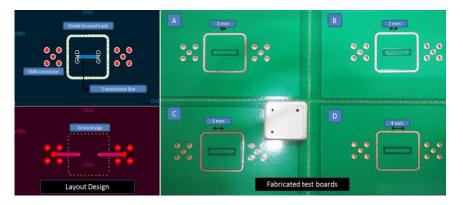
Layout design and fabrication of test boards with various grounds via spacing
